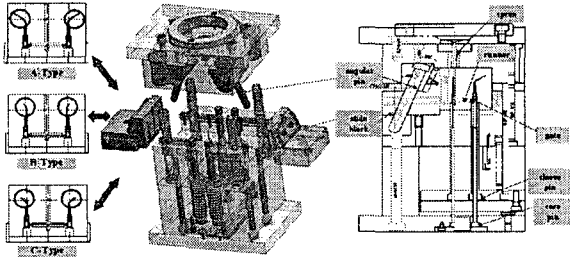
Detail scaler tip mold of 2D/3D drawing.
